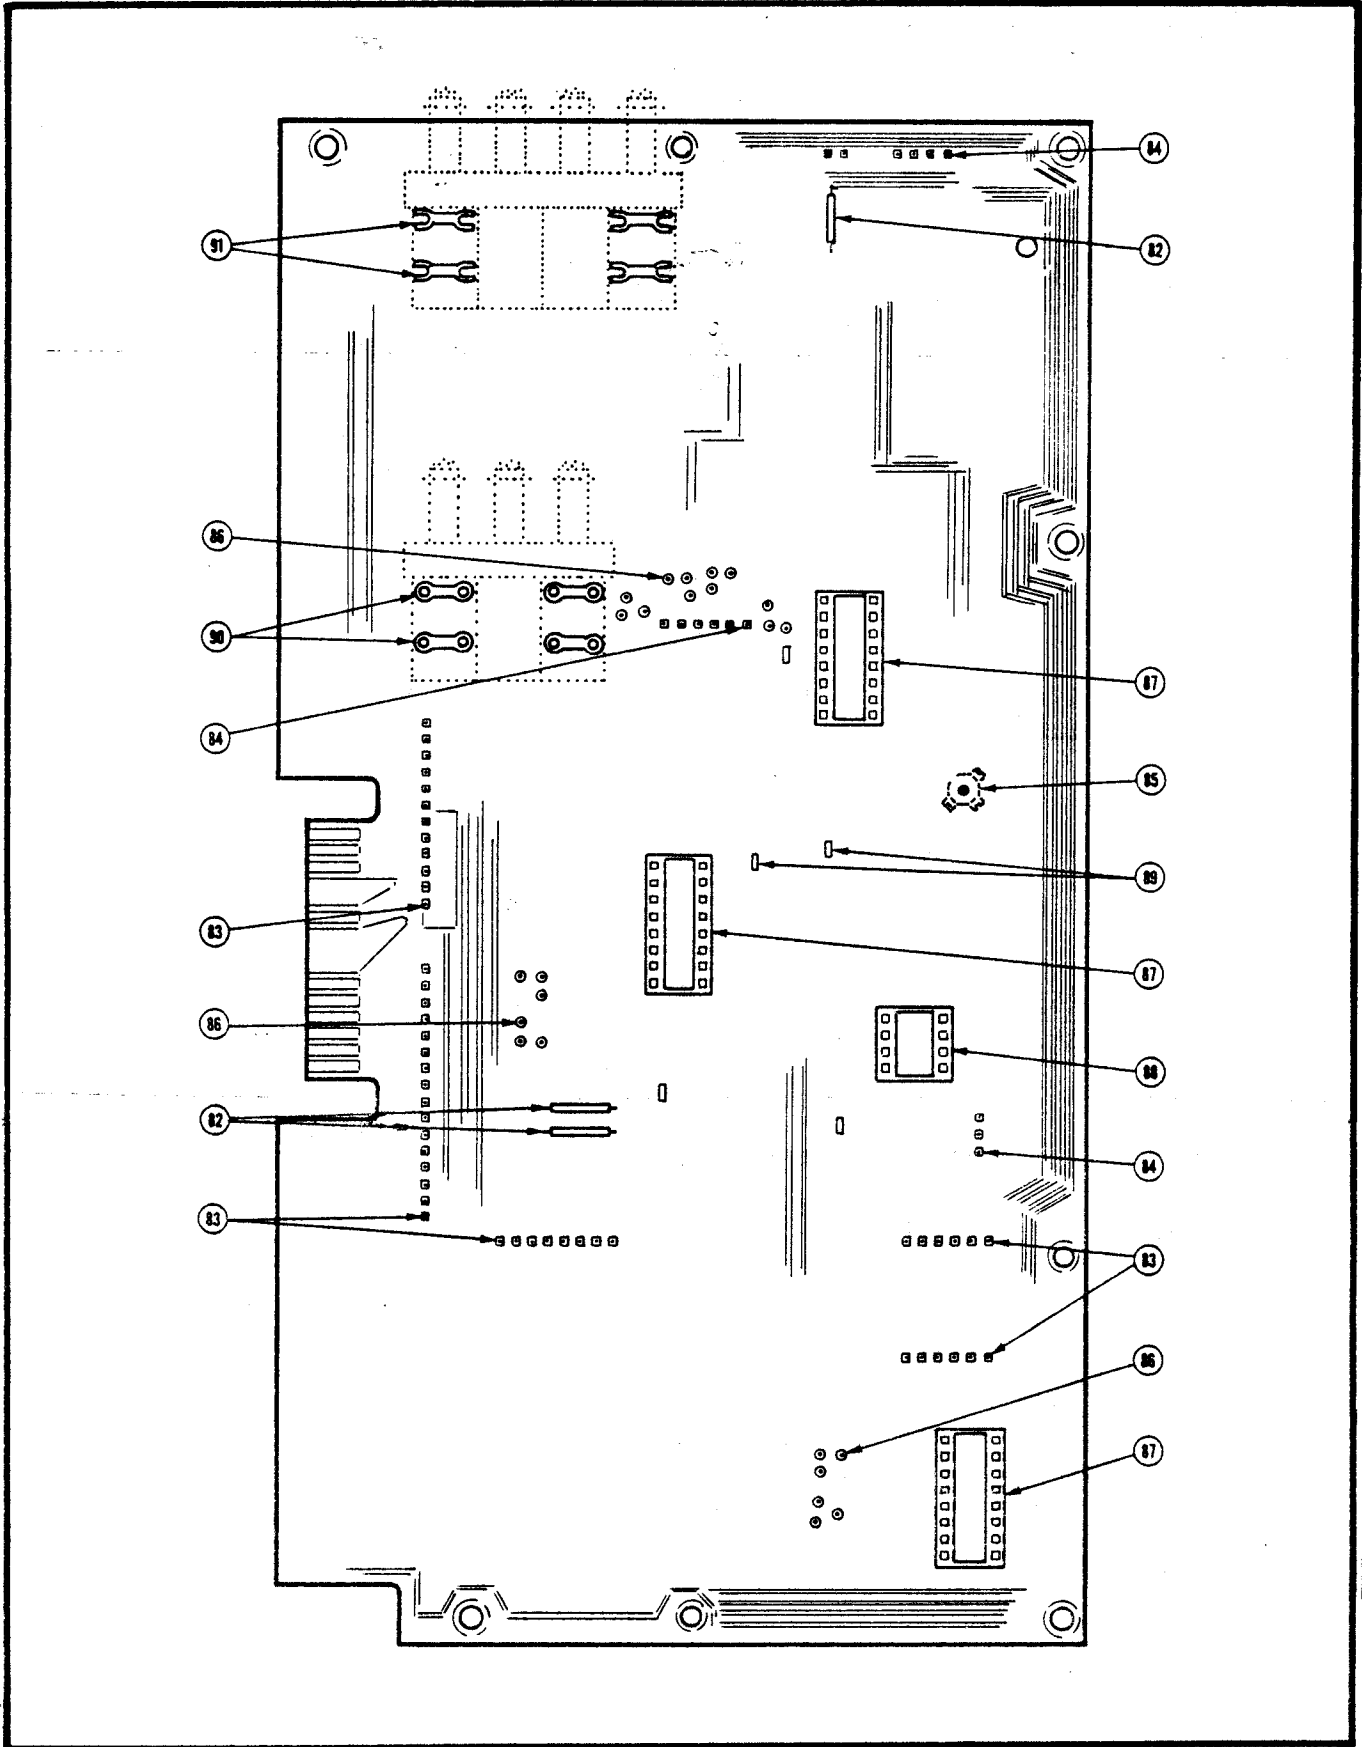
A8 Circuit Board Assembly, Sweep (sheet 3 of 3).
